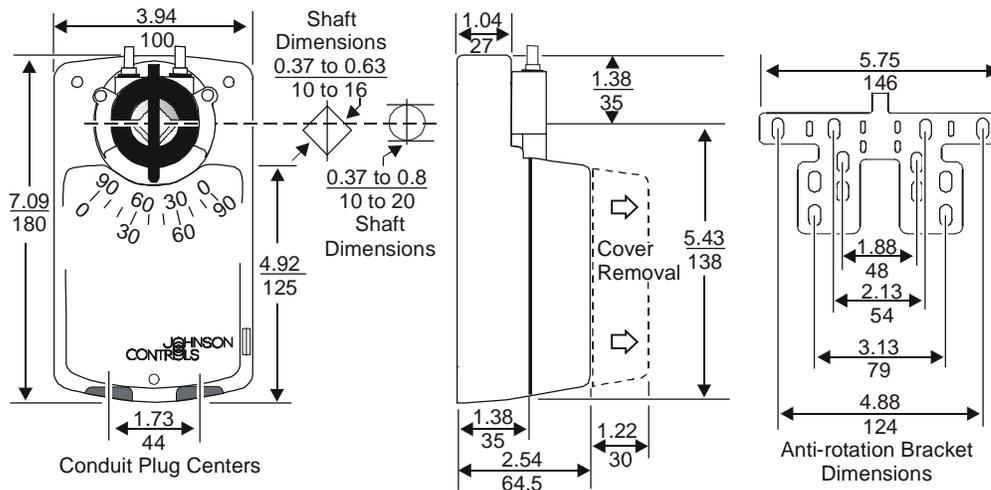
Actuator and Anti-Rotation Bracket Dimensions, in. (mm)
